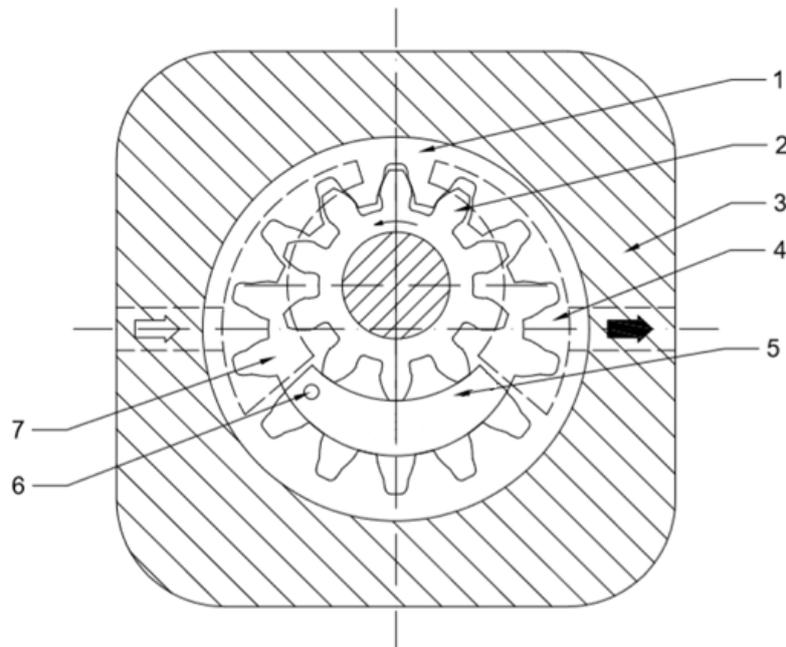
General scheme of a gear pump with internal gearing. 1 – gear wheel, 2 – gear wheel, 3 – pump body, 4 – pressure space, 5 – sickle insert, 6 – protection pin, 7 – suction space.
